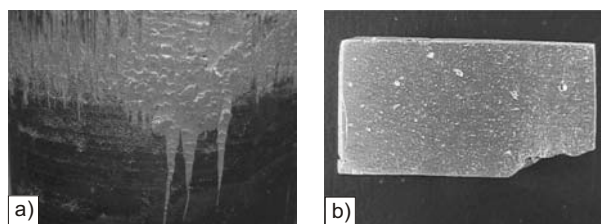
Example of defects that occur at stage VII (removal of cast from mould):
